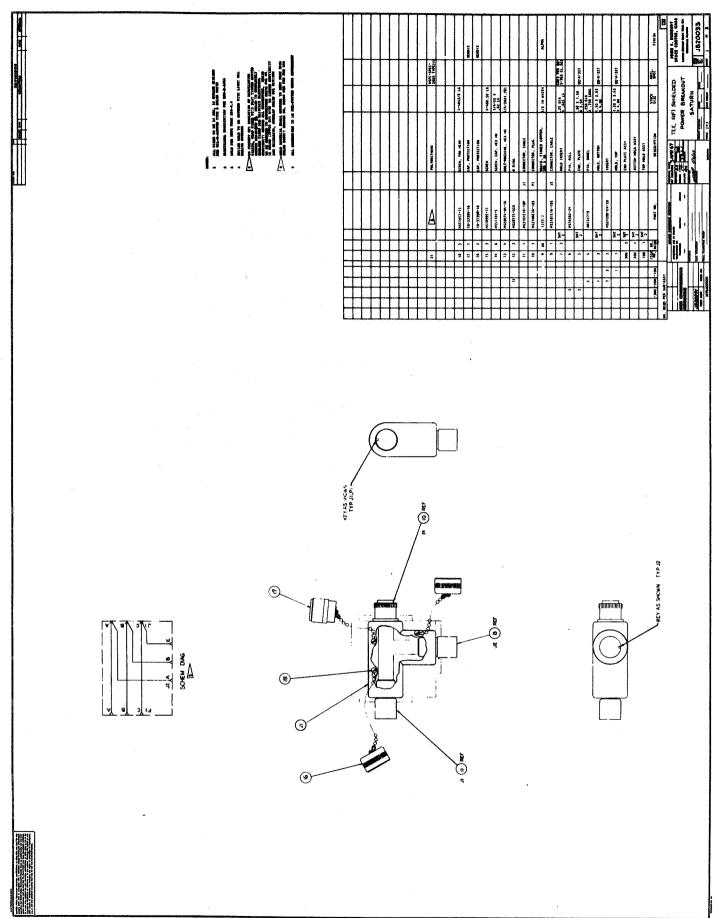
Molded Tee Adapter (Sheet 1 of 2)
